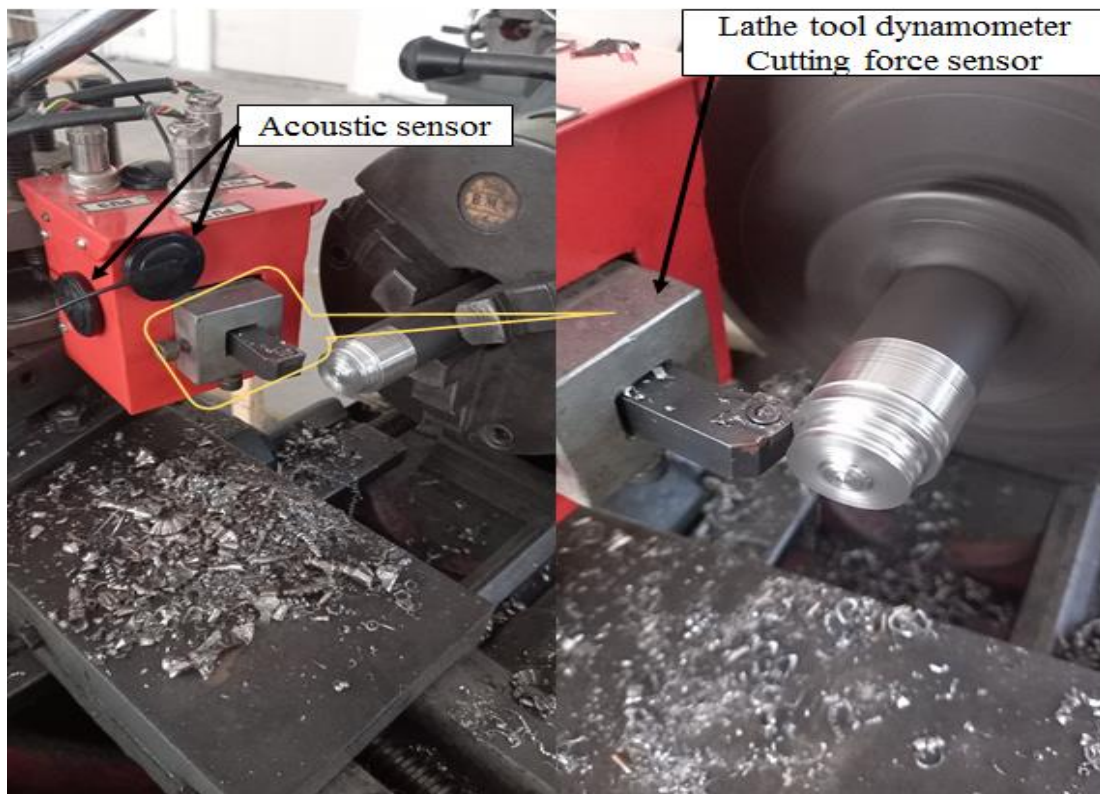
Cutting Force Measurement Lathe Tool Dynamometer Experimental Setup.
